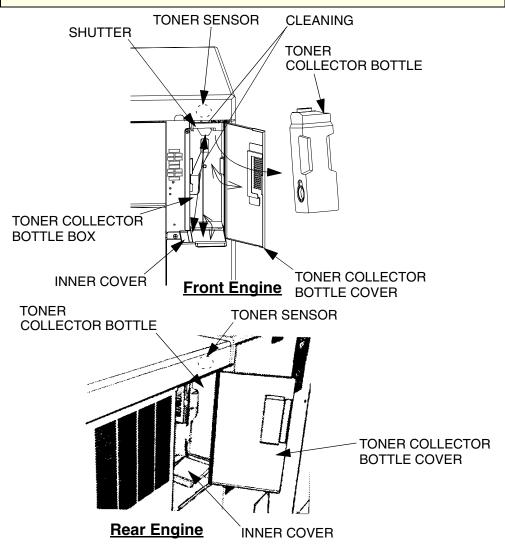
Cleaning of the Toner Collector Bottle Joint
